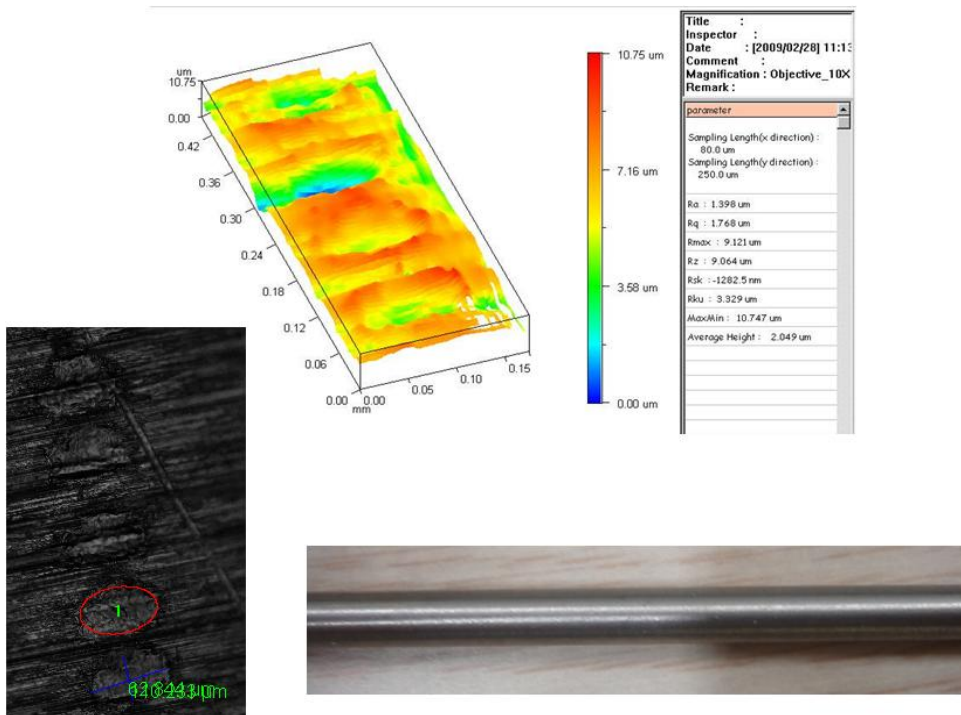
Implant Specimen Sample Testing Machining Analysis
